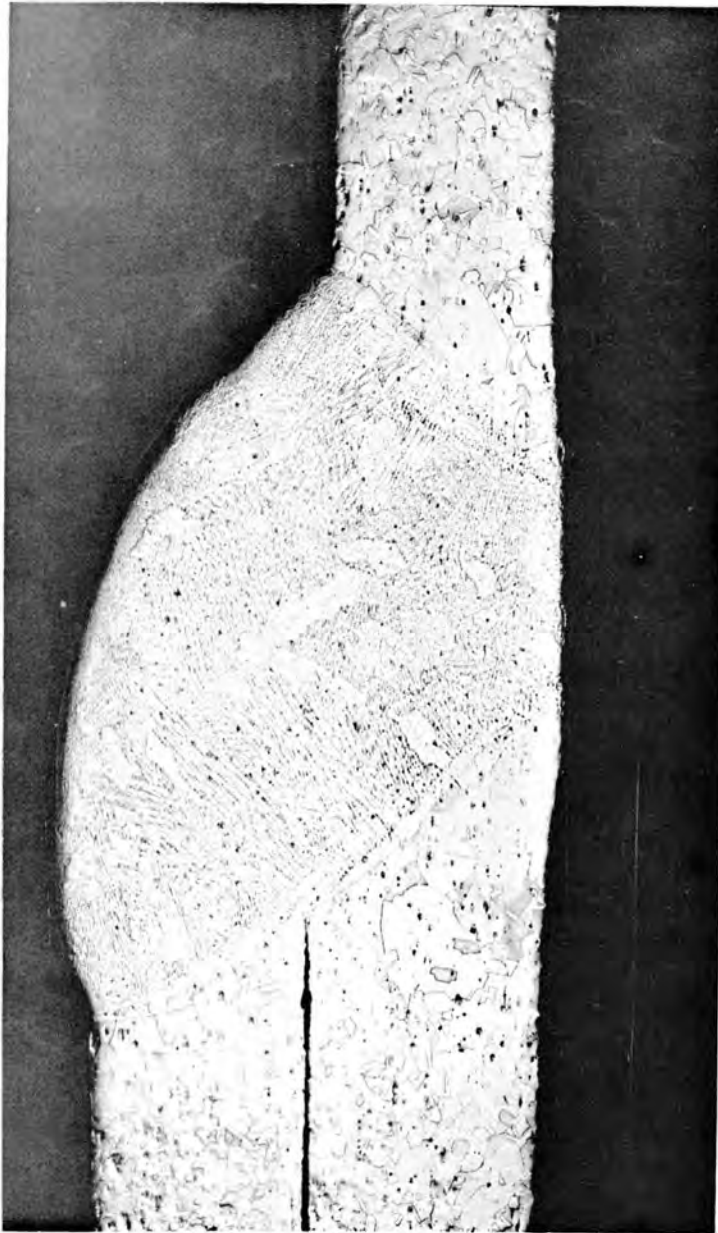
(Y-8456) Socket Type Joint Selected for Serpentine Coils in Reactor Core.
